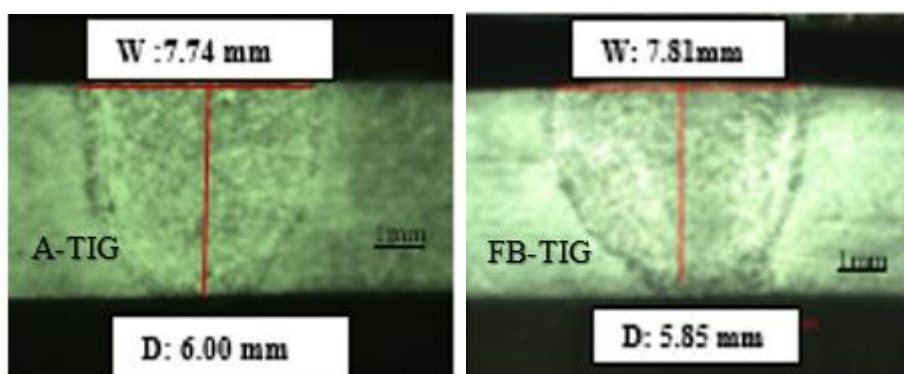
Macrostructure of A-TIG weld metal (D/W: 0.77) and FB-TIG weld metal (D/W: 0.74)
